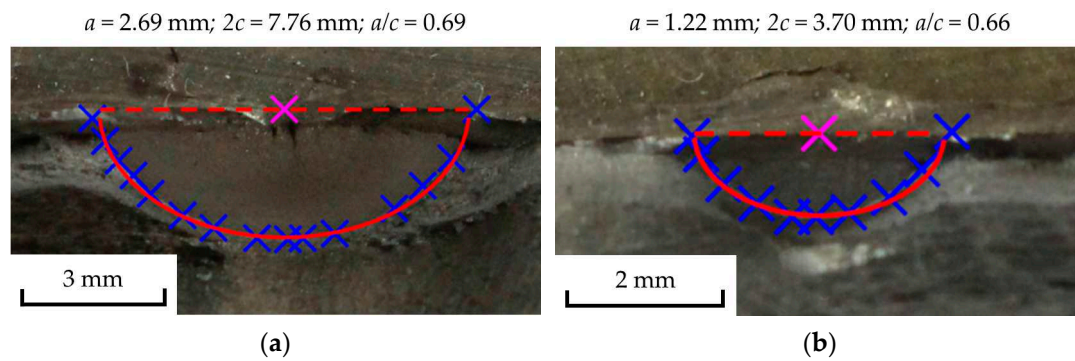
Measurement of not-through crack size by fitting a semi-ellipse: (a) Specimen 1; (b) specimen 2.
